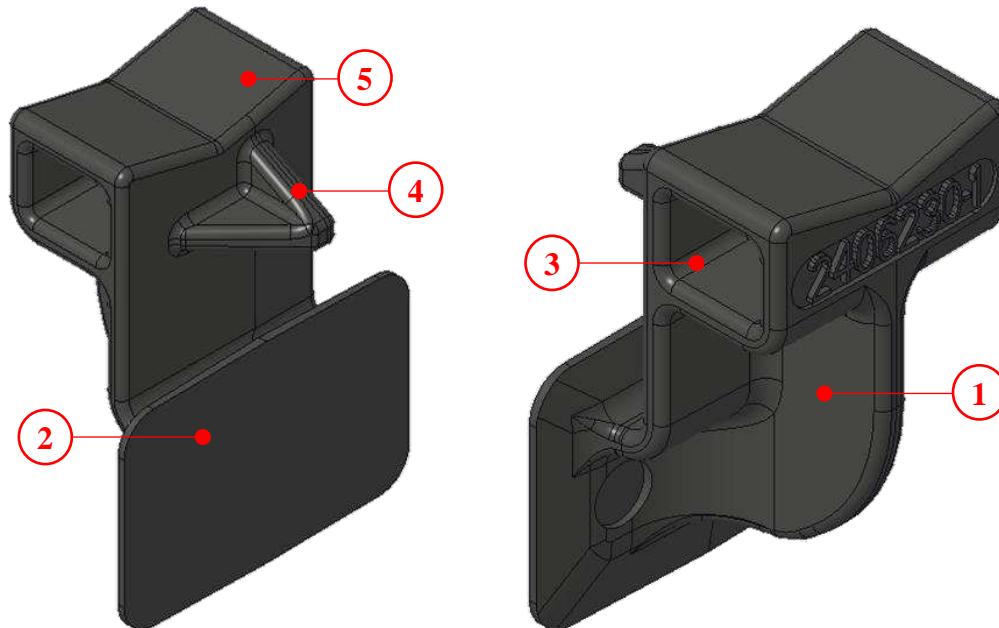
Edge-mount Bracket Design (P/N 2406230-1)
